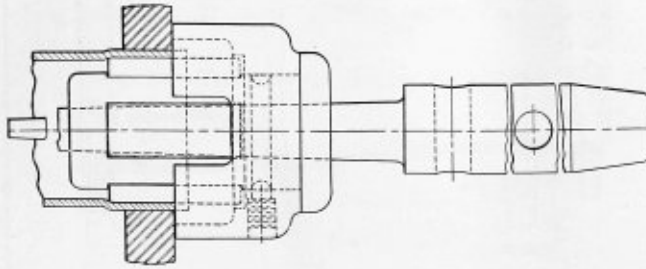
Rolling the Tube in the Front Tube Sheet
